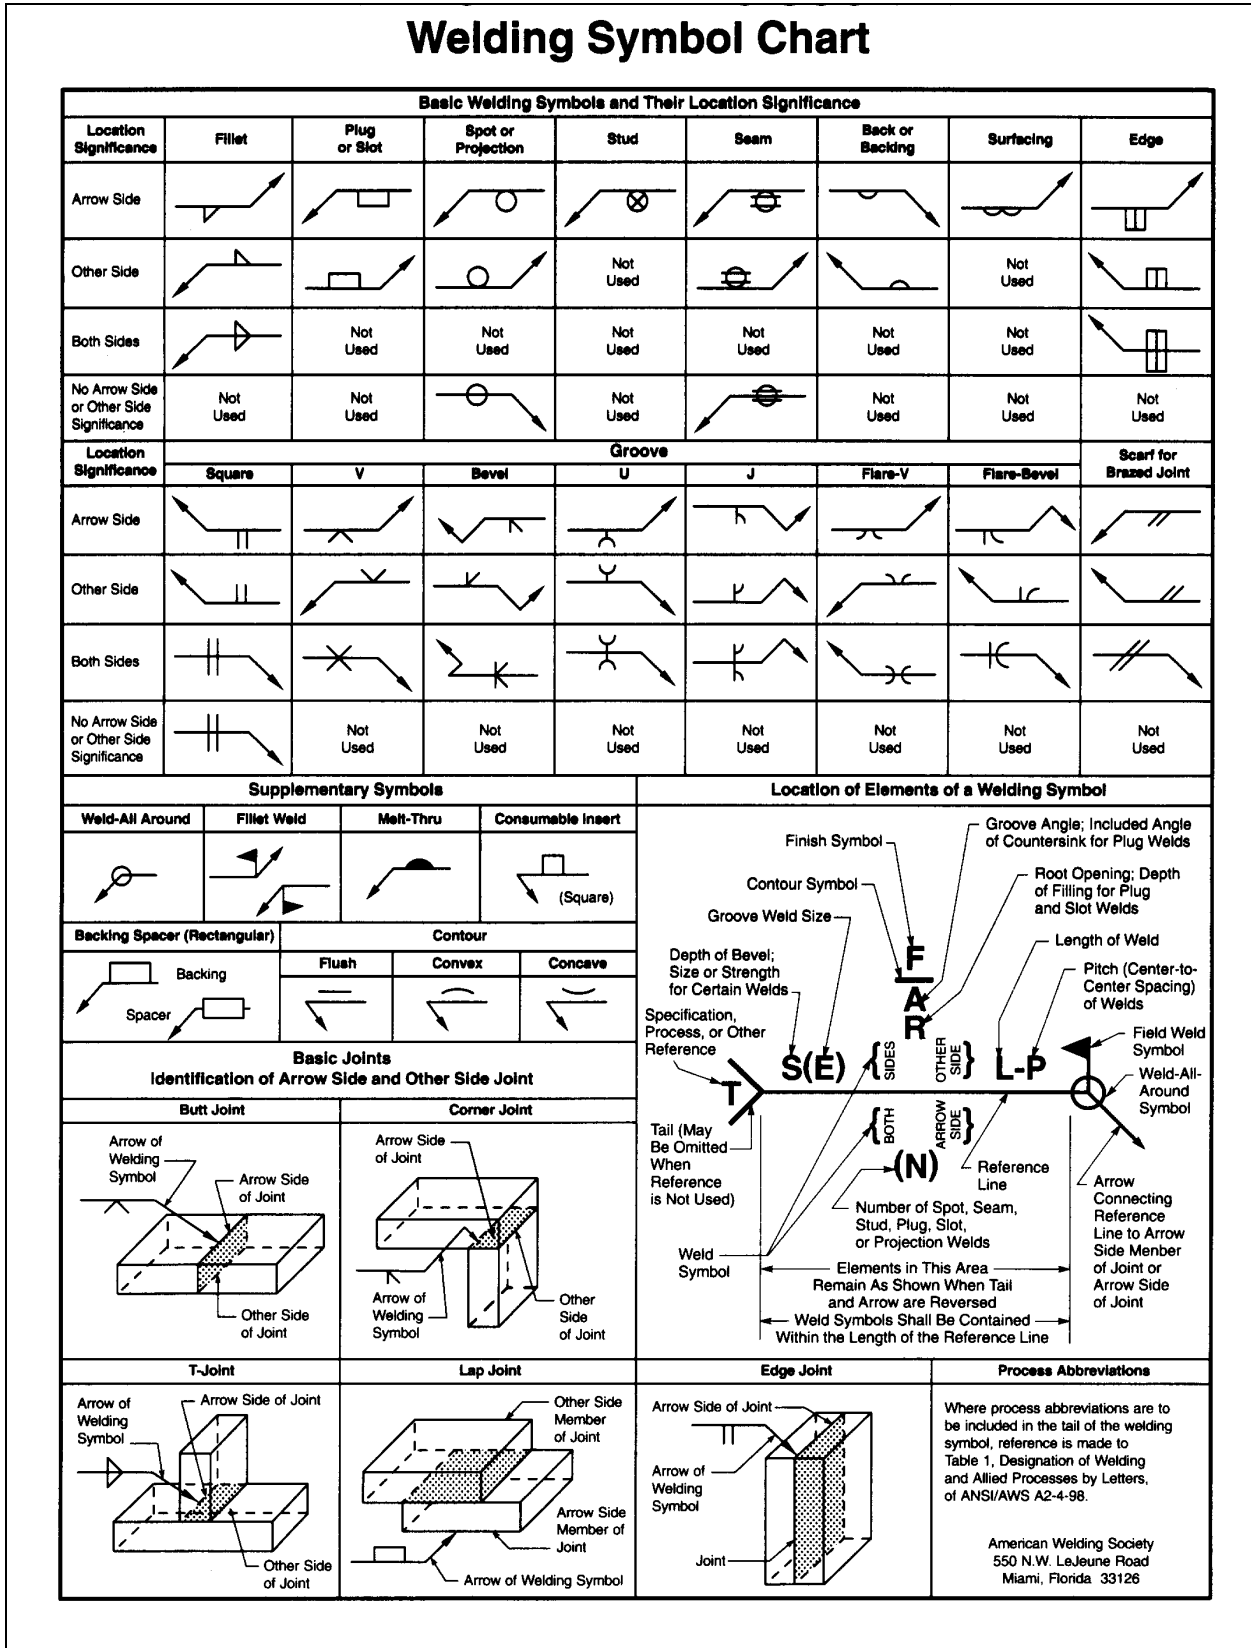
American Welding Society Standard Welding Symbols (Courtesy of the American Welding Society) (2 of 2)
